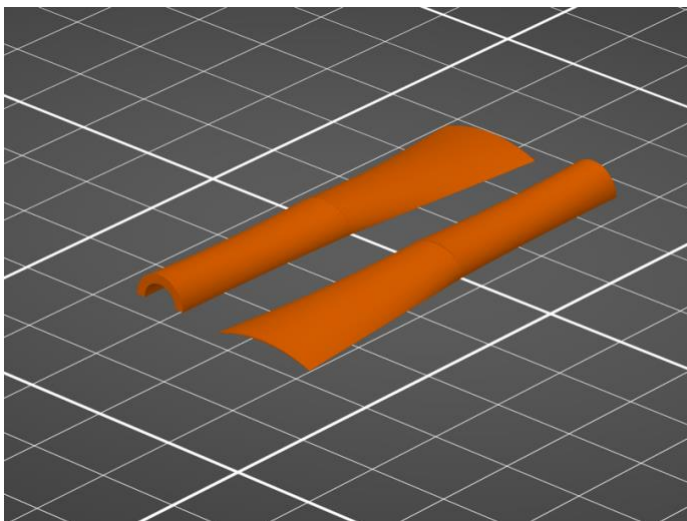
is showing the CAD virtual 3D model of reeds that are designed to be printed separately designed for this study.
